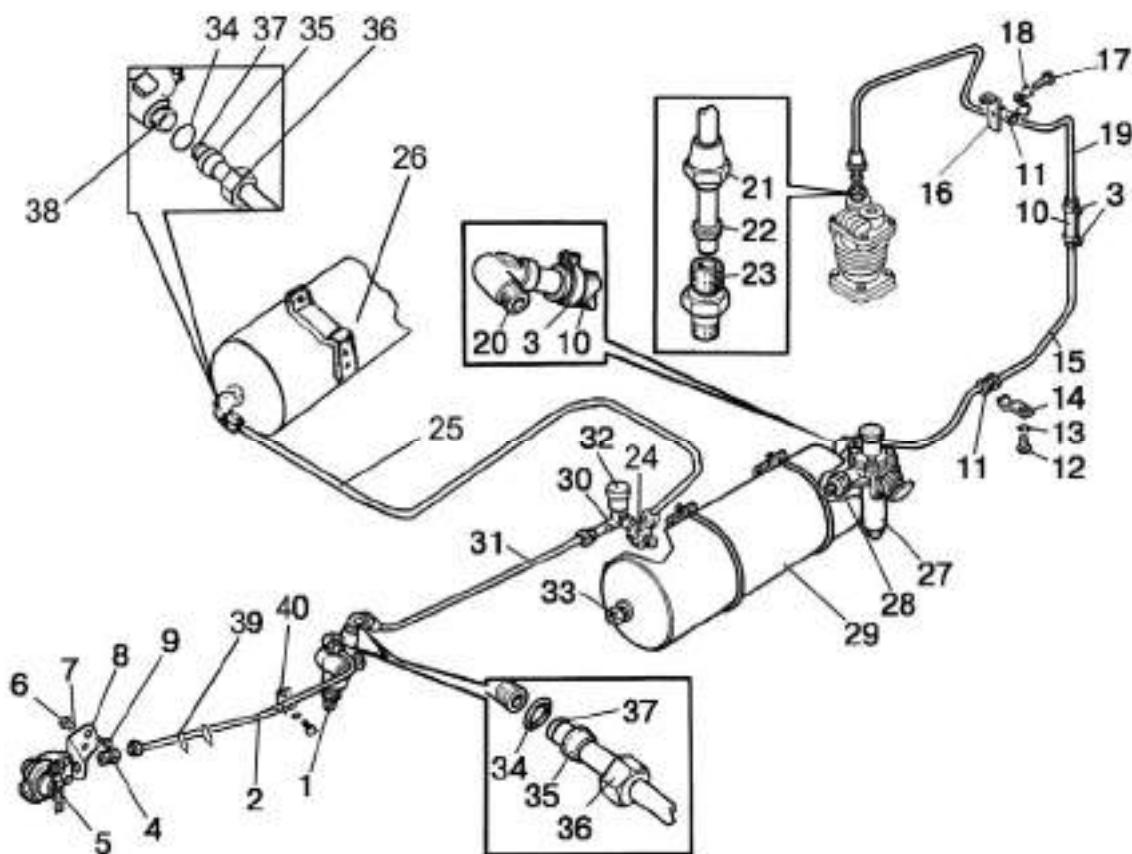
Pipelines and fittings of the single-line pneumatic actuator of the trailer brakes
